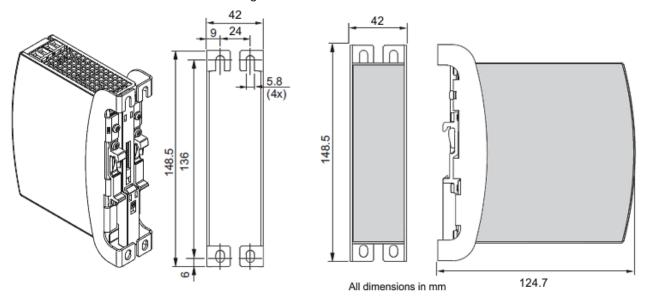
Isometric view, installation dimensions bracket for wall mounting
